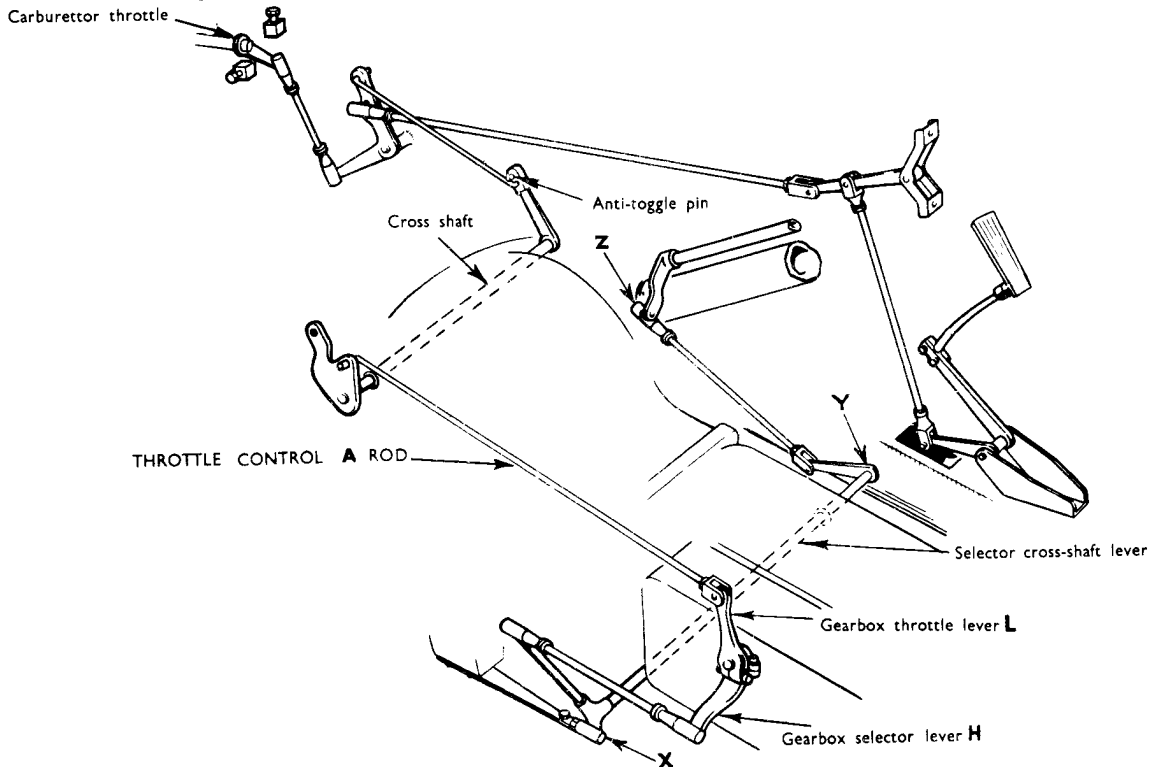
THROTTLE AND MANUAL CONTROL LINKAGE
